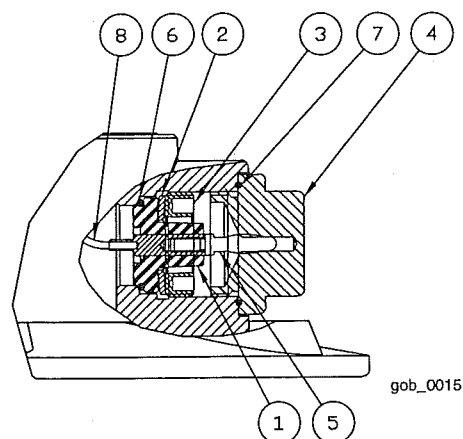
Previous design of test tap 2769 518-A (self-earthing)
